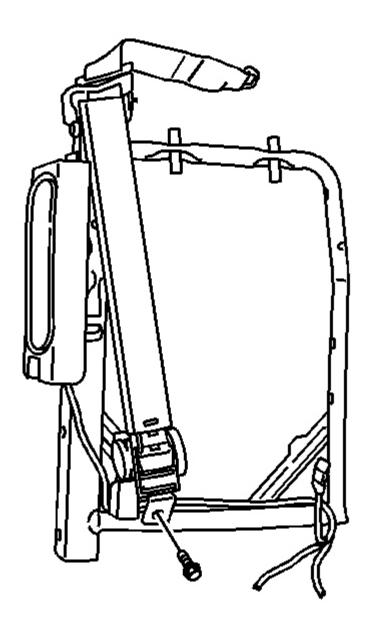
Removing/Installing Lower Seat Belt Retractor Retaining Bolt Courtesy of GENERAL MOTORS CORP.
